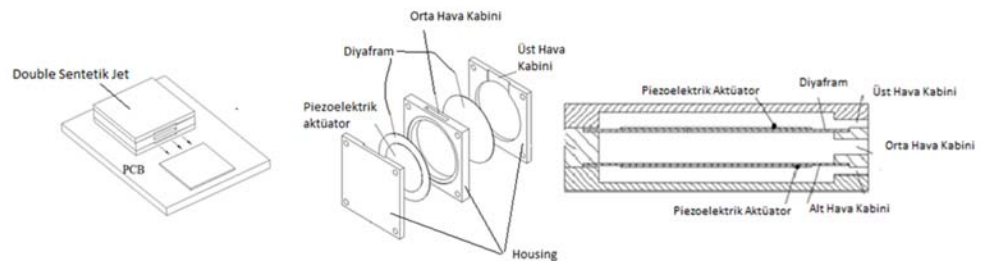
Figure A. Design of double-acting synthetic jet a) assembly drawing b) de-mounting image c) sectional view
